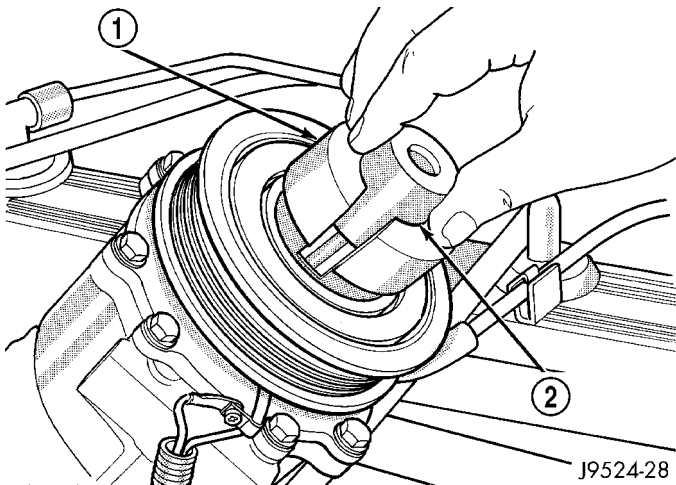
CLUTCH NUT REMOVE - Typical
